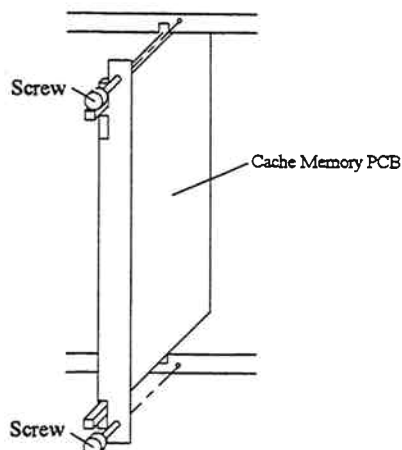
Insertion of the Cache Memory PCB
